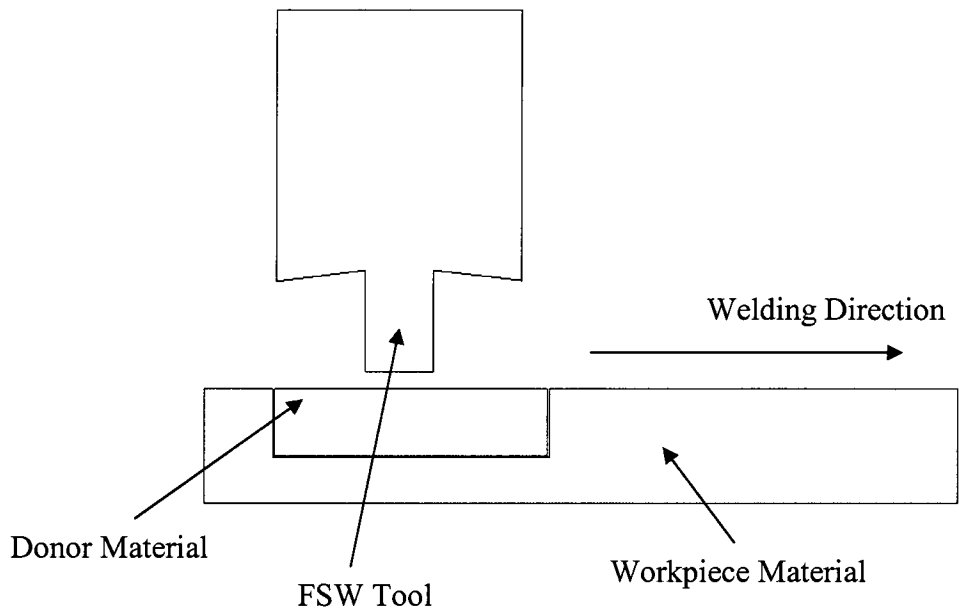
FSW tool plunging through a donor material and preheating the workpiece
